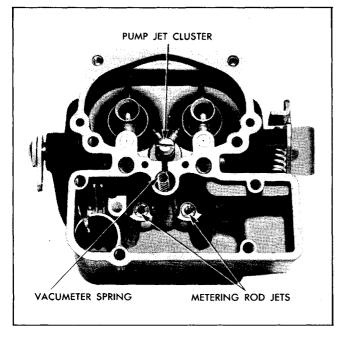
B-21 Carburetor Bowl Assembly-Carter
